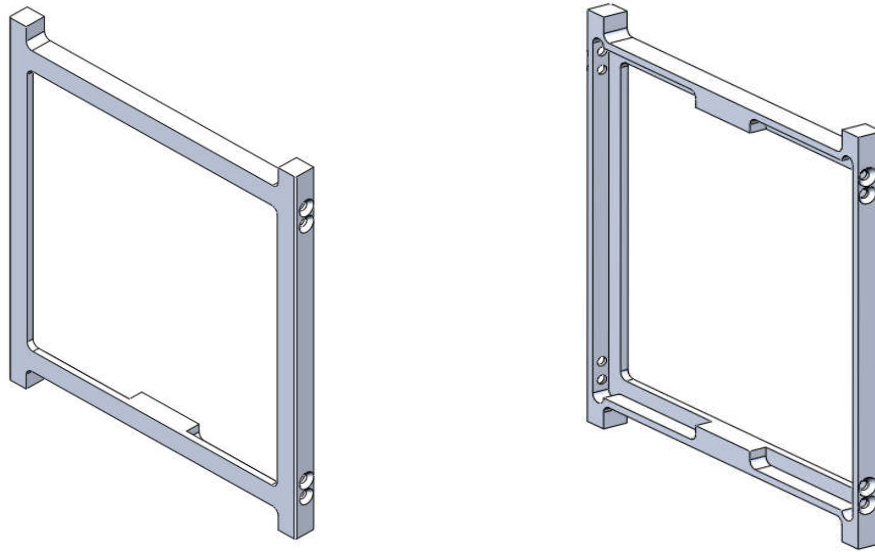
Sidepanel (SP) Front and Rear Iso Views
